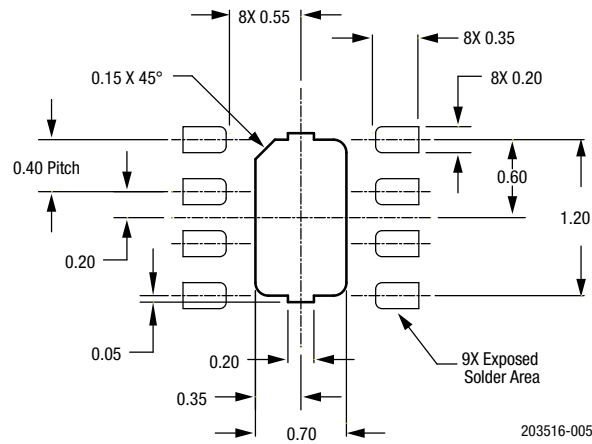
SKY13593-690LF PCB Layout Footprint (Top View)
